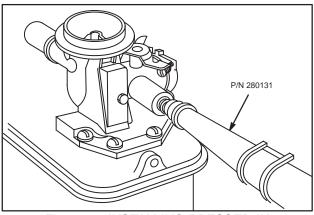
INSTALLING PRESSED-IN NEEDLE VALVE
